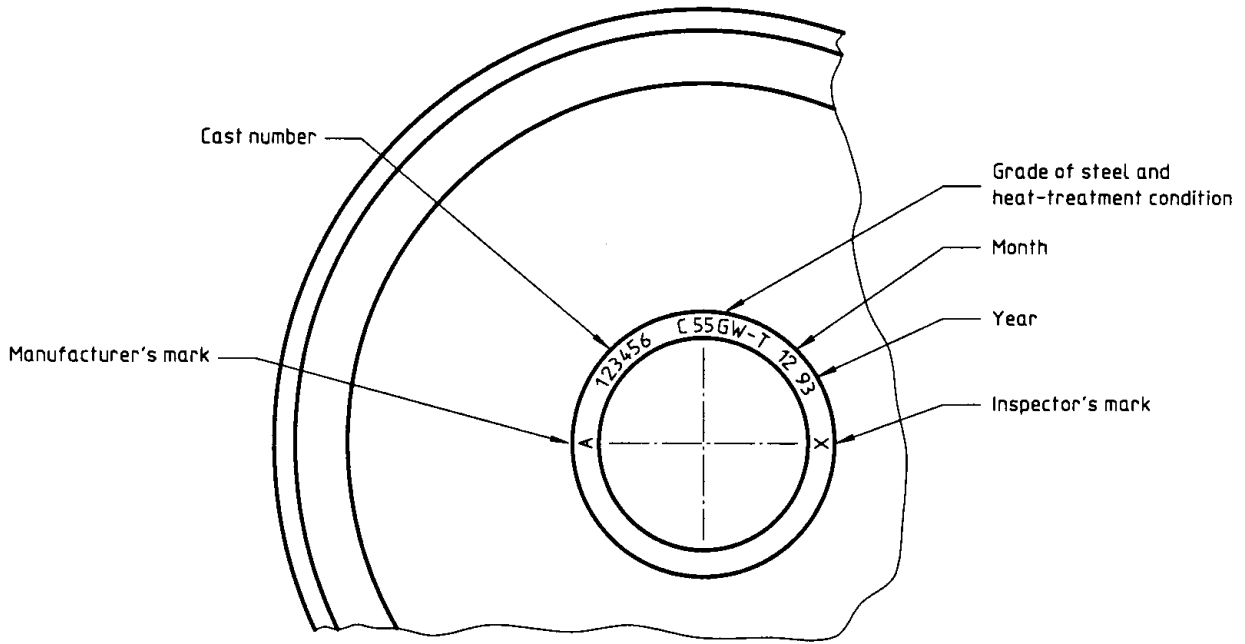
Example for marking of rolled, forged or cast wheels by stamping (see 5.6)
